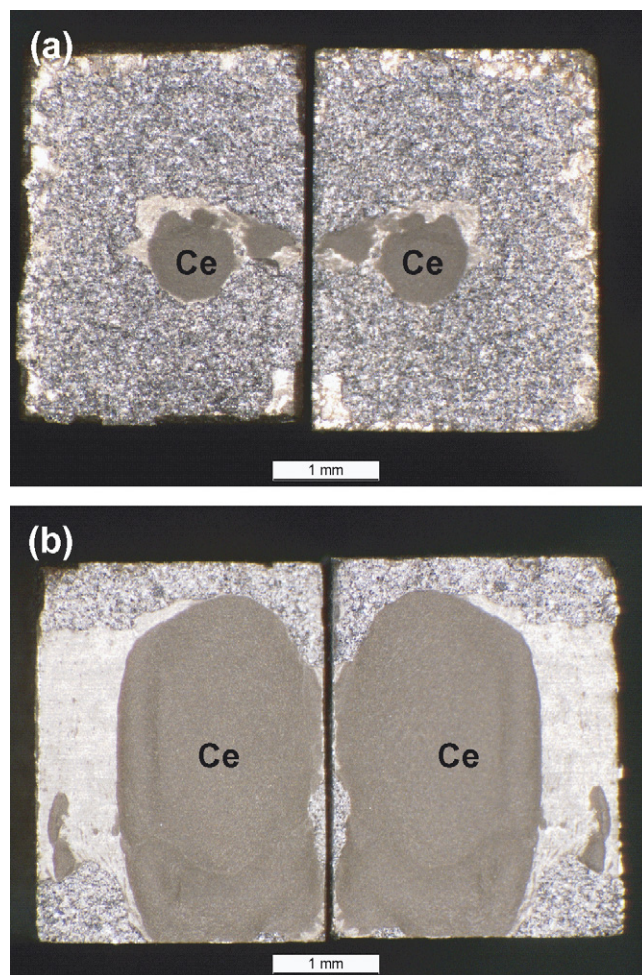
Fracture surfaces of ceramic-to-steel joints with the Incusil ABA + 30 vol.% SiC sandwich system: (a) fracture can occur mainly through the braze filler alloy and (b) fracture can also occur through both the ceramic and the braze.
